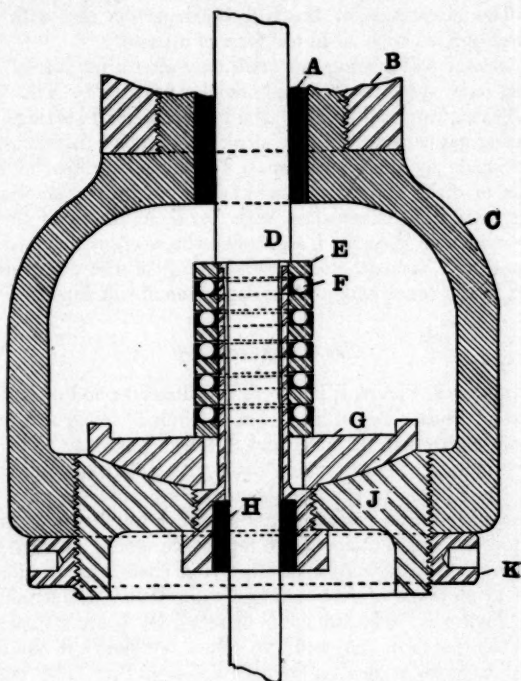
The Thrust Bearing. $\frac{1}{2}$ size.
